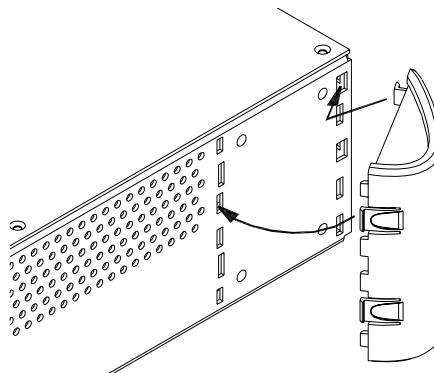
Attaching the BlueView Chassis Desktop Bumper
